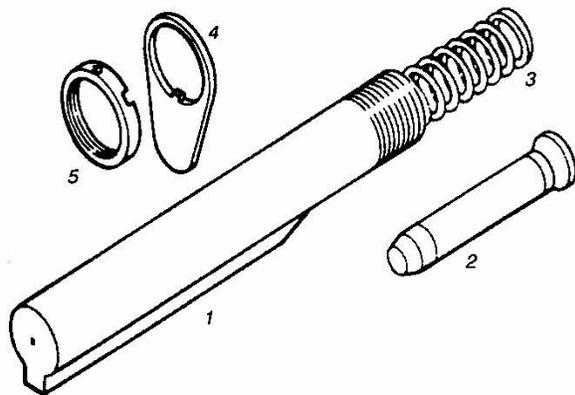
Collapsible stock buffer assembly: 1) receiver extension tube, 2) buffer assembly, 3) action spring, 4) receiver end plate, 5) receiver extension nut.
